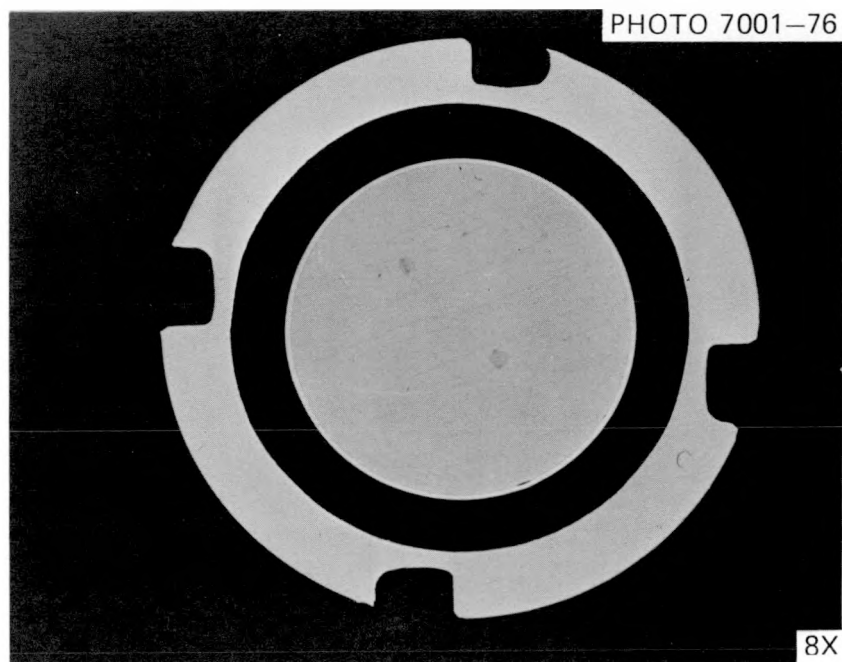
Cross section from unheated region of fuel simulator 2828017 showing improper machining of grooves.
